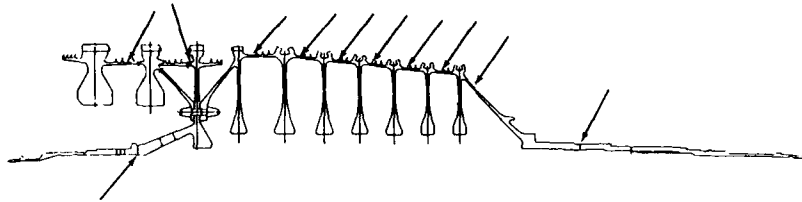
ADVANCED F100 COMPRESSOR ROTOR SYSTEM INERTIA - WELD LOCATIONS
